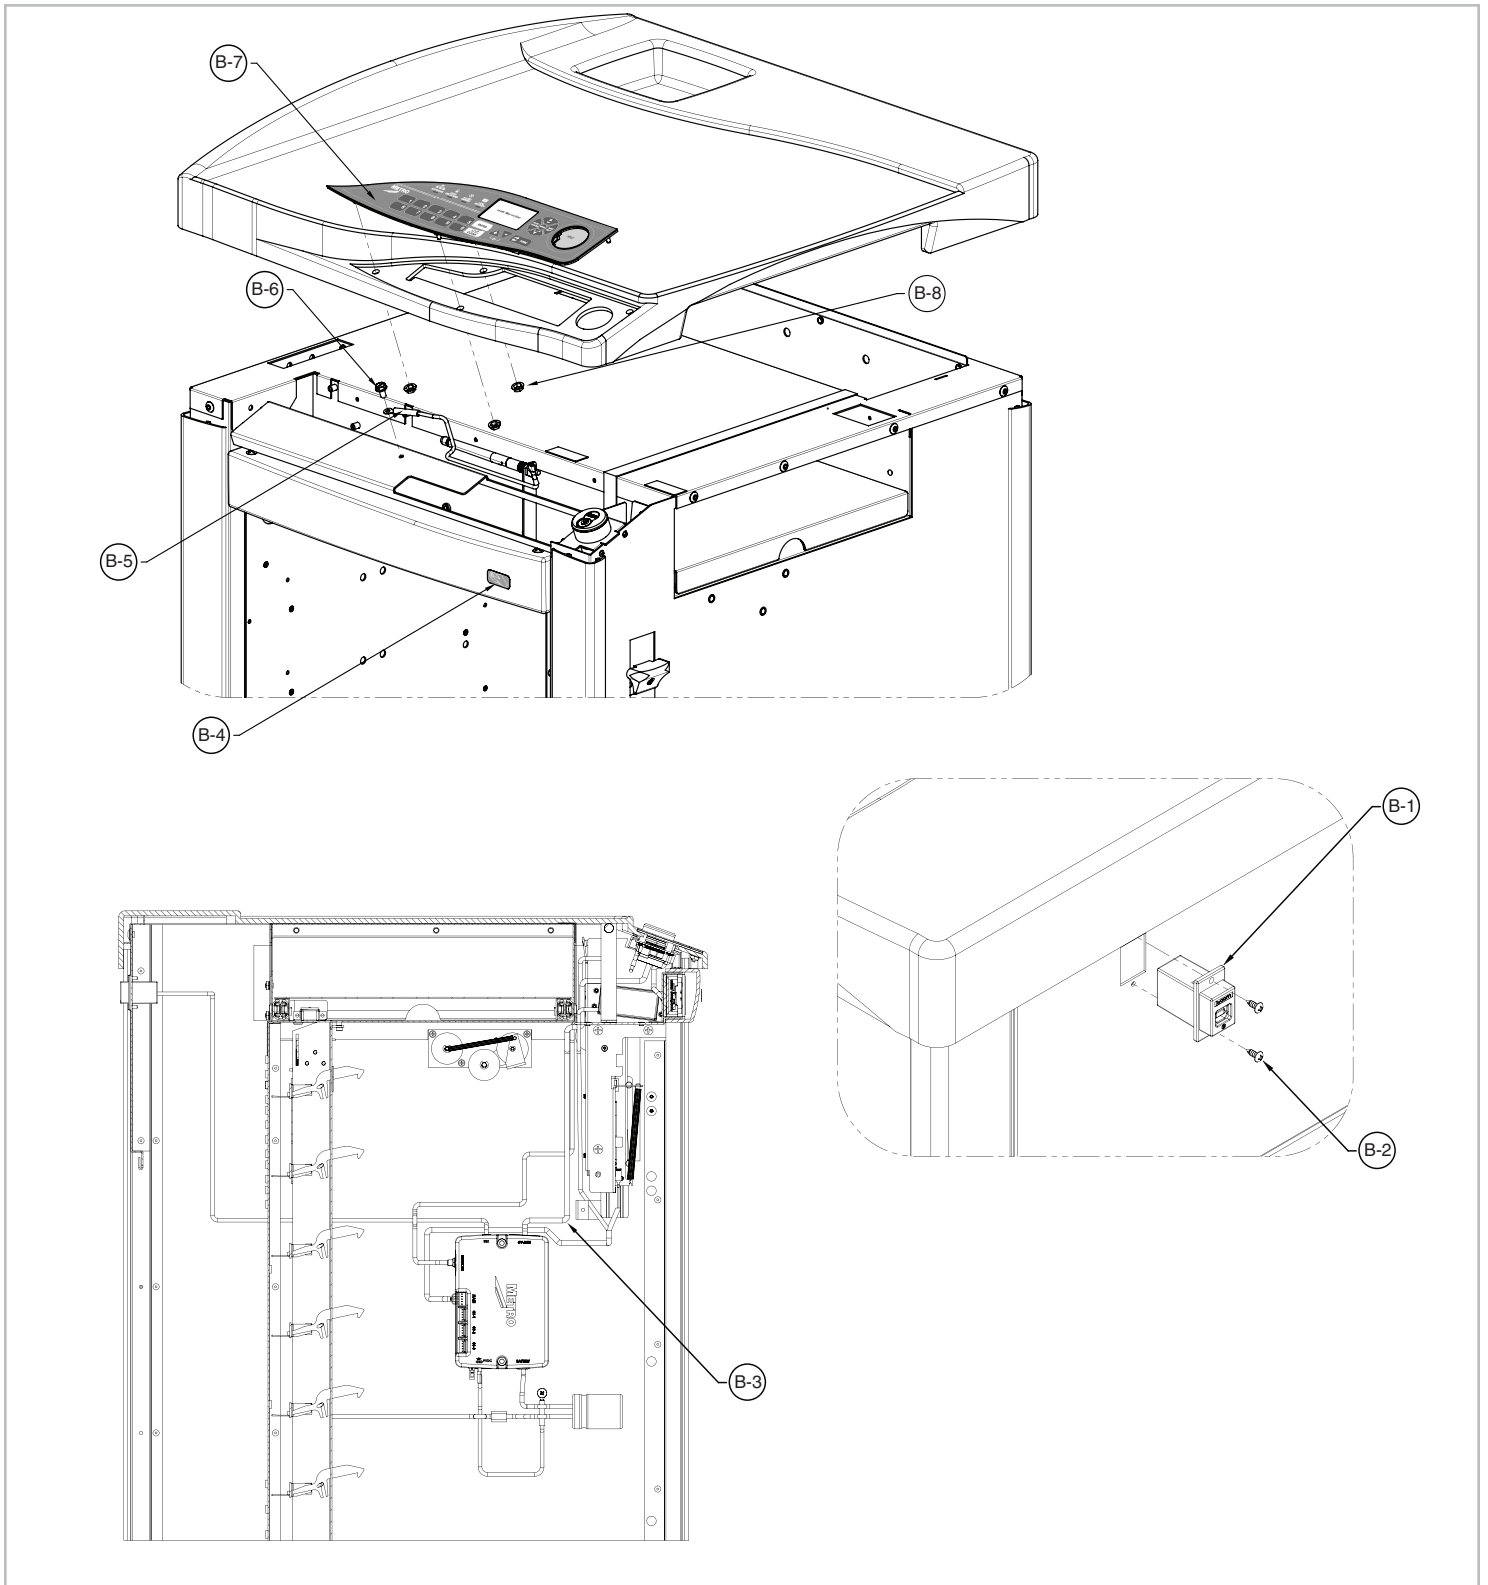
LOCATION OF USB AND KEYPAD ASSEMBLY
